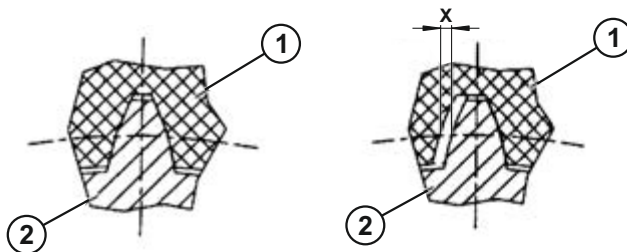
Measurement of gear rim wear on the ROTEX® claw coupling
